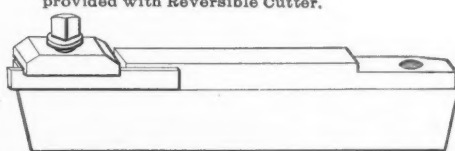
Smith & Coventry Swivel Tool-holder for Screw Cutting.
